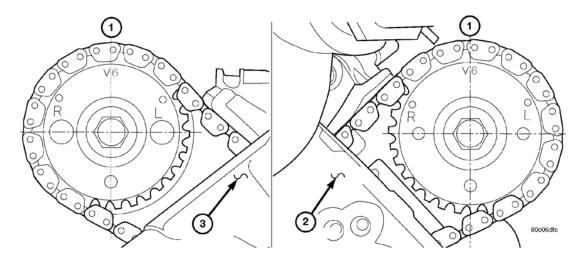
Camshaft Sprocket V6 Marks Courtesy of CHRYSLER LLC
